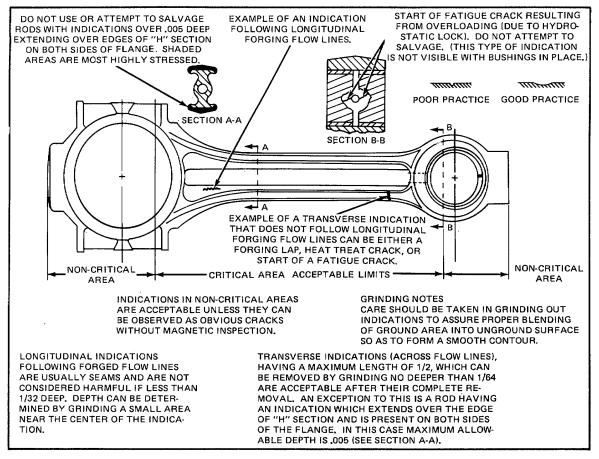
Magnetic Particle Inspection Limits for Connecting Rod
